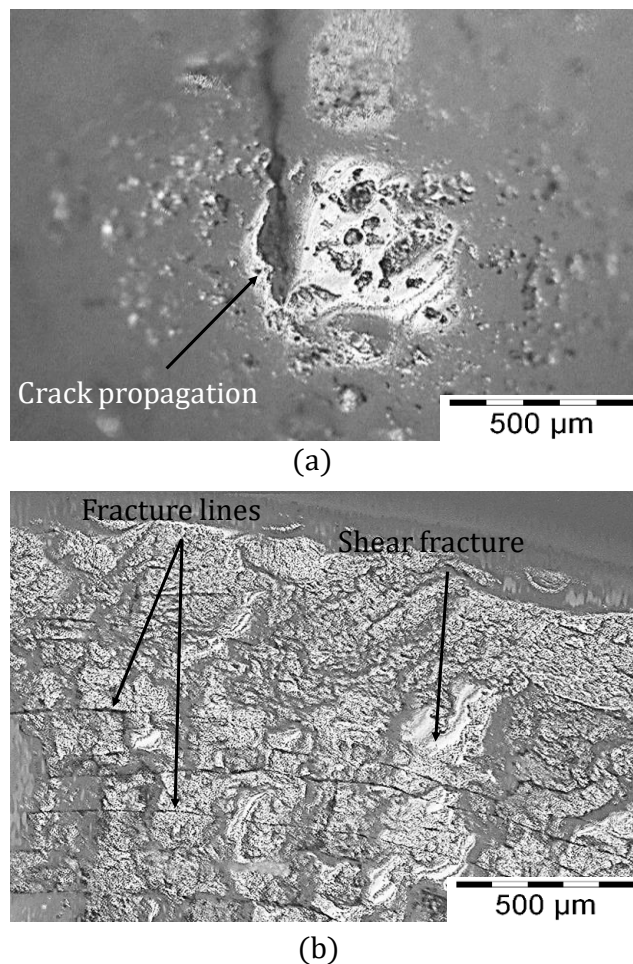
(a) Crack propagation in 4.46 mm ball and (b) Fracture surface of the ball.
